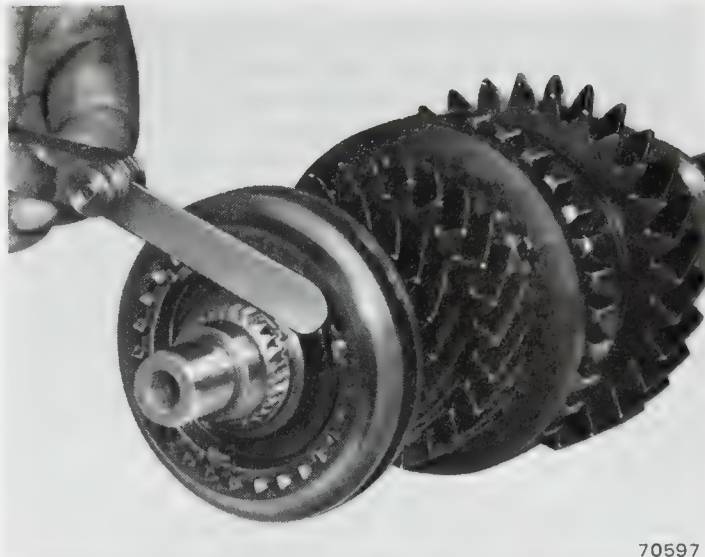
B-69 Measuring Third-Fourth Synchronizer End Play
